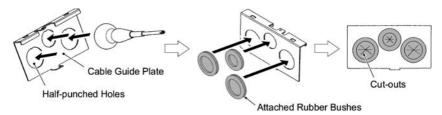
Punching out the Holes and Mounting the Rubber Bushes
